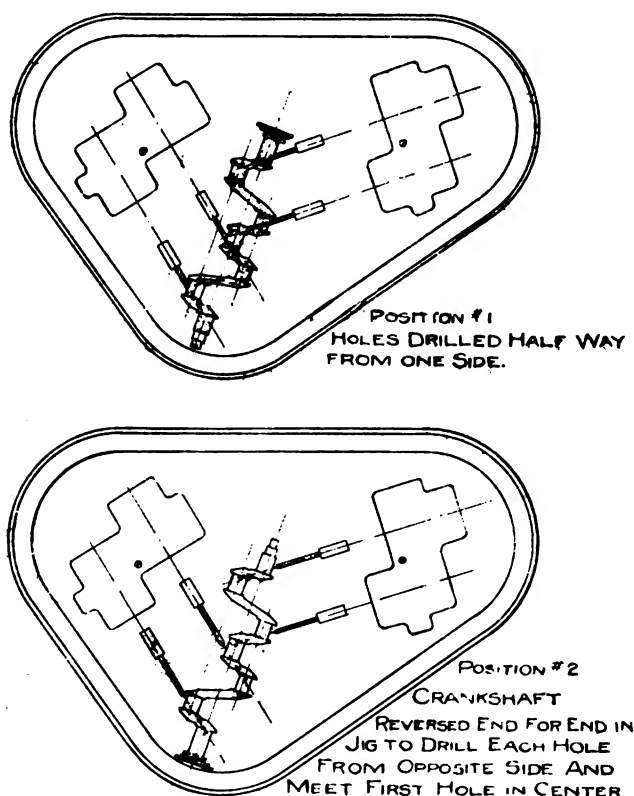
Sketches showing method of handling crankshafts in Harrington machine
